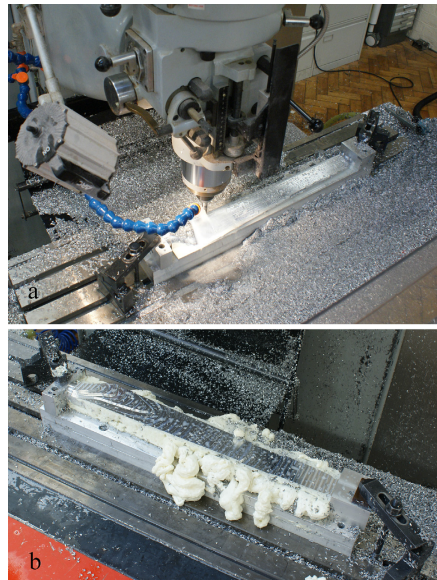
CNC machining of turbine blade. (a) shows machining of the first side and (b) shows the set-up for machining of the second side with foam packing.³
